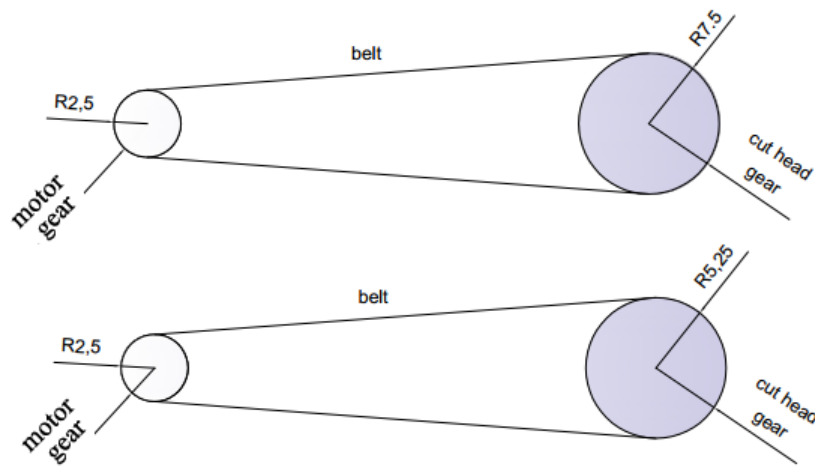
Diameter of pulley cutting head and motor pulley
